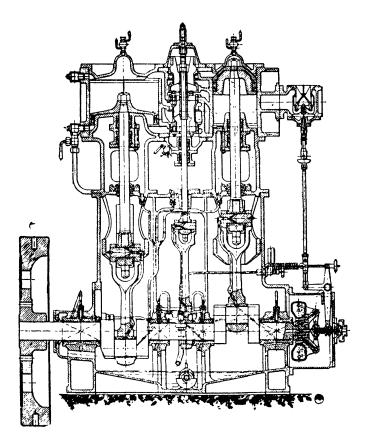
Section of "Belliss" Patent Compound Self-Lubricating Engine.
